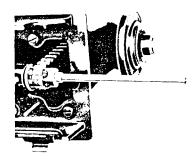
Putting Belt on Lower Pulley with Belt Replacer 244005
